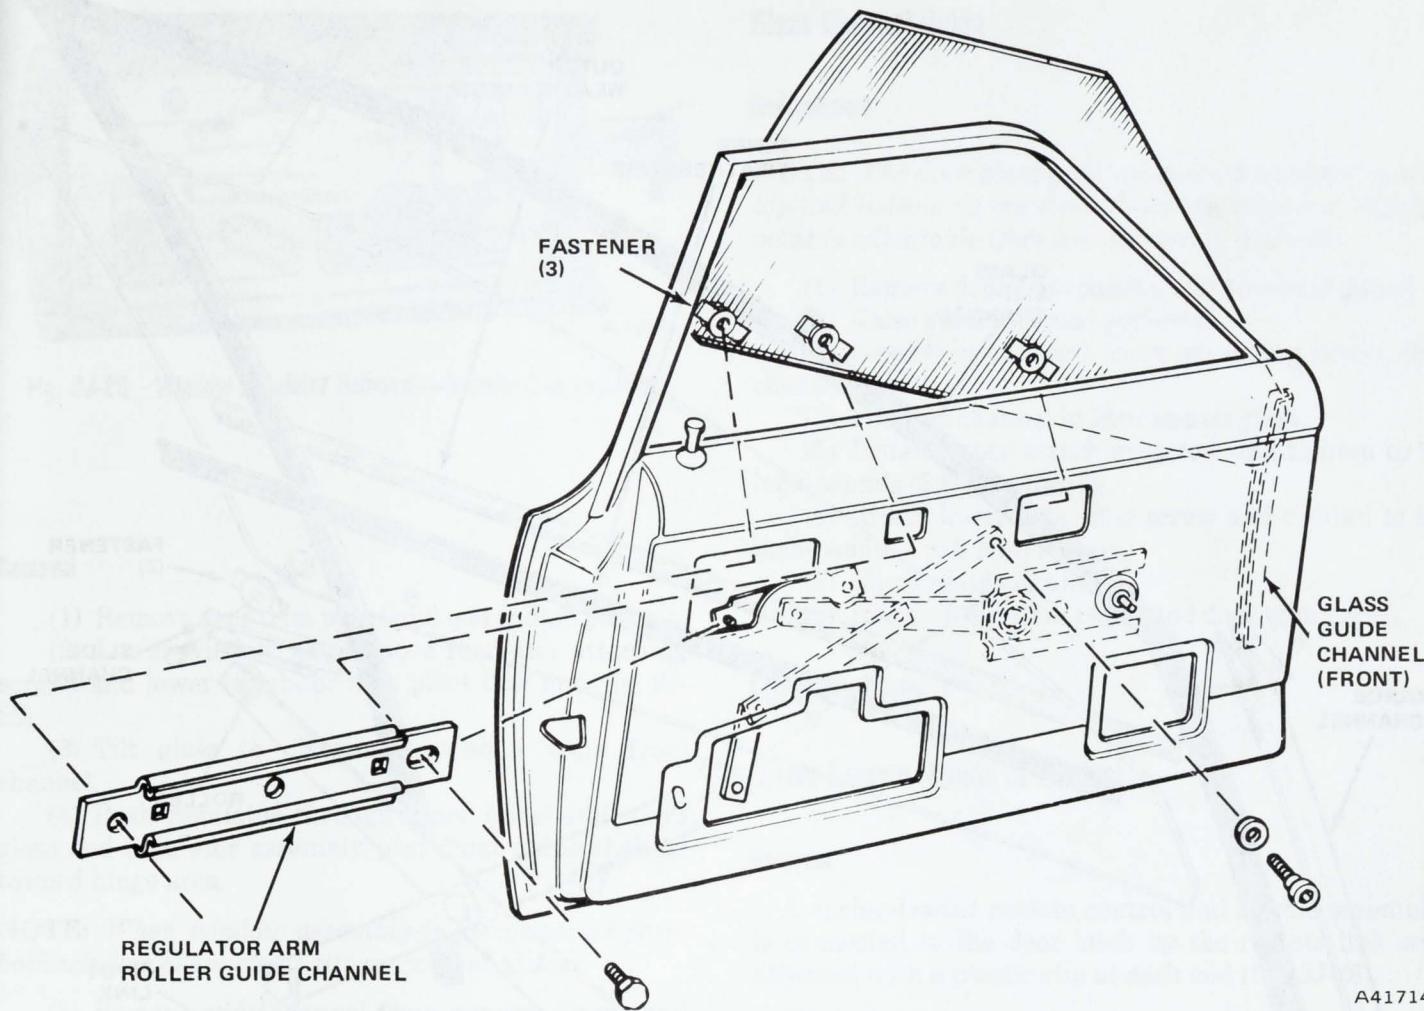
J-23 Glass Removal—Gremlin-Concord-AMX
